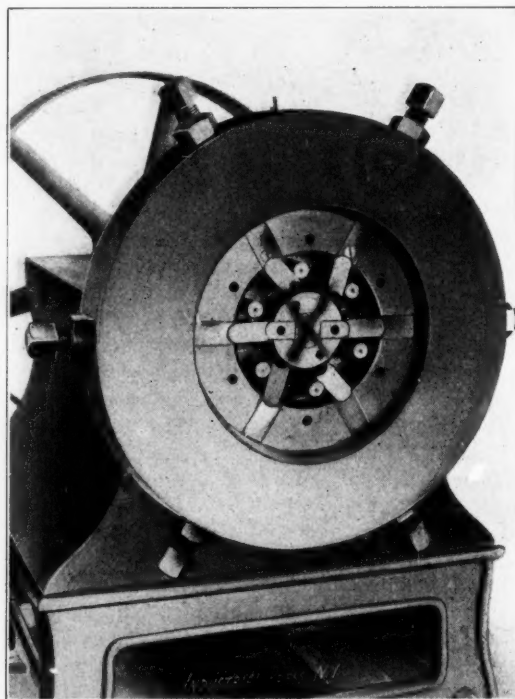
Goodyear Rotary Swaging Machine, showing Arrangement of Dies and Toggles.
